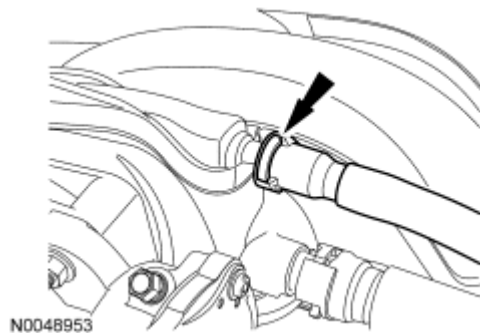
Locating EVAP Canister Purge Valve Vapor Tube
